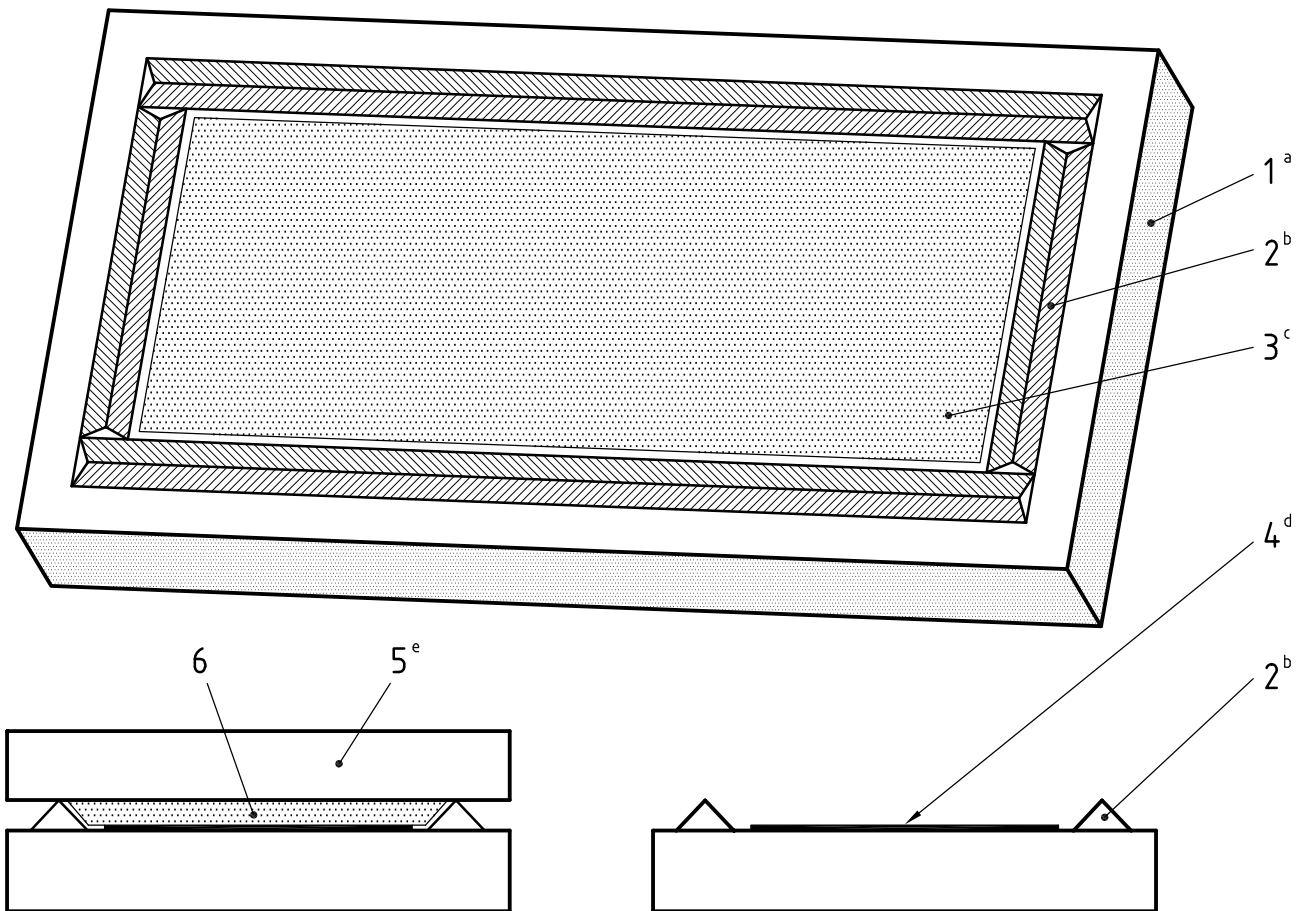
Split mould for forming specimens — Elastic recovery, Type 2 materials
